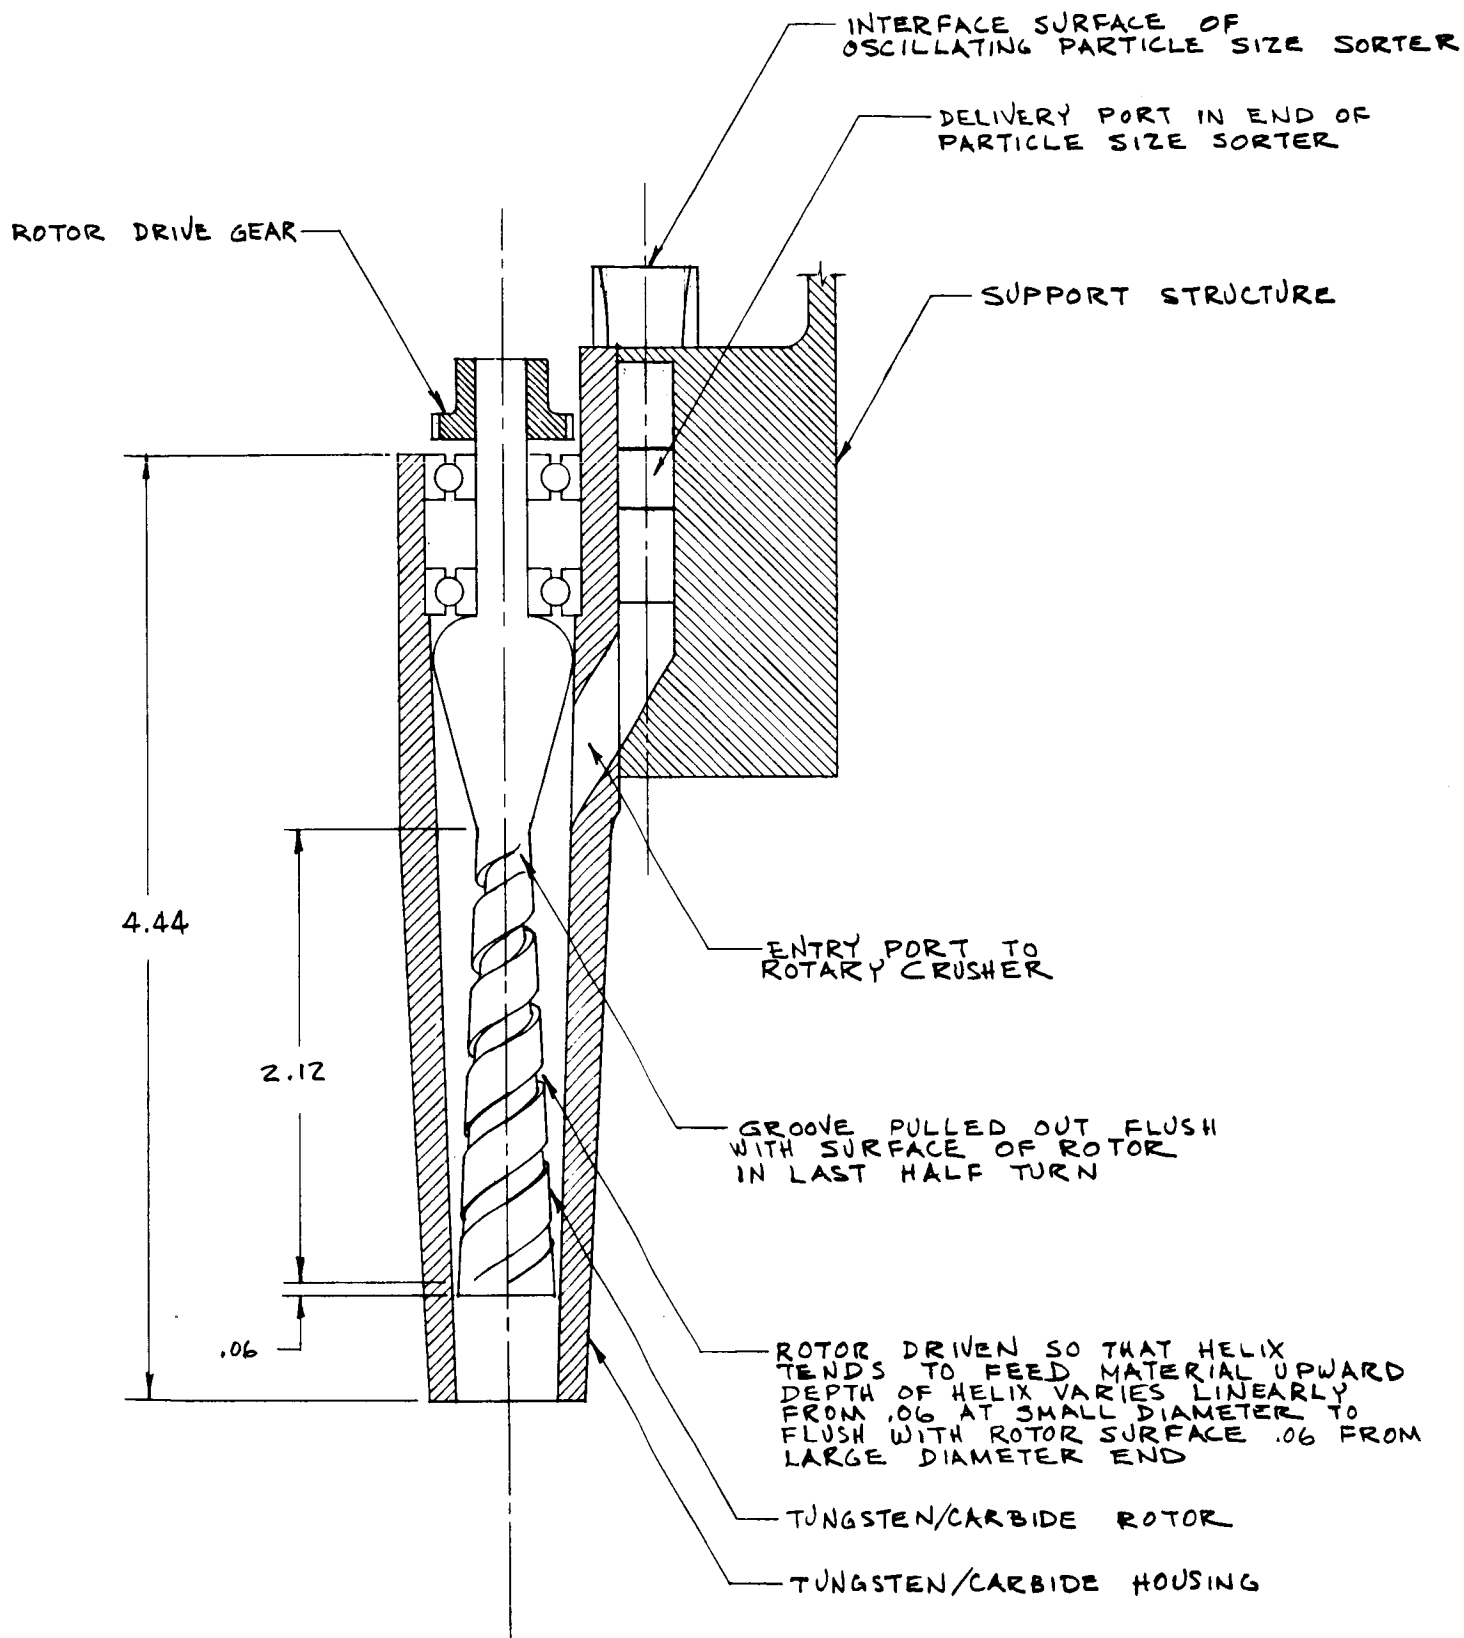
SECTIONAL VIEW OF PARTICLE SEPARATOR
